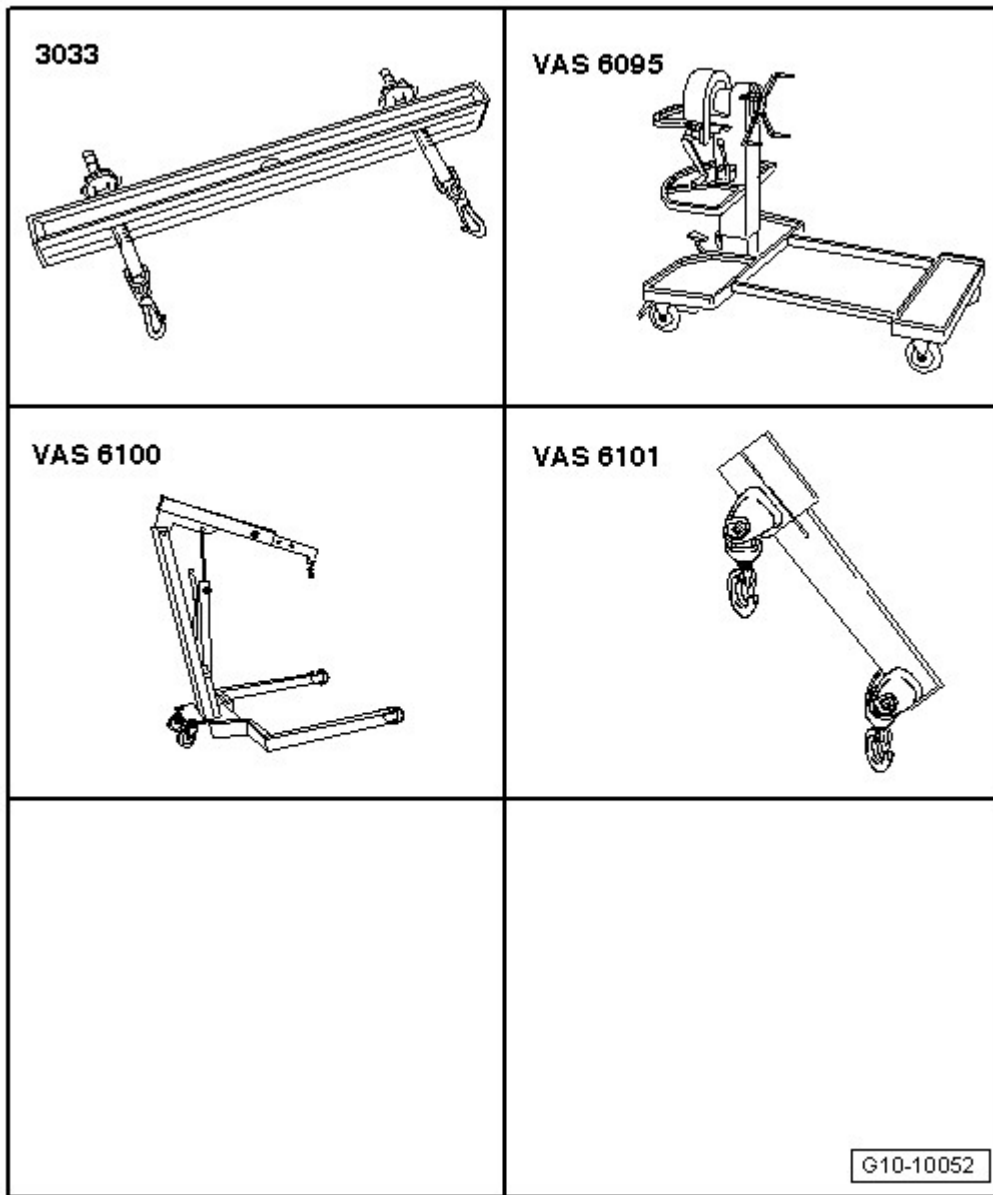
Identifying Special Tools -- Engine, Securing To Assembly Stand
